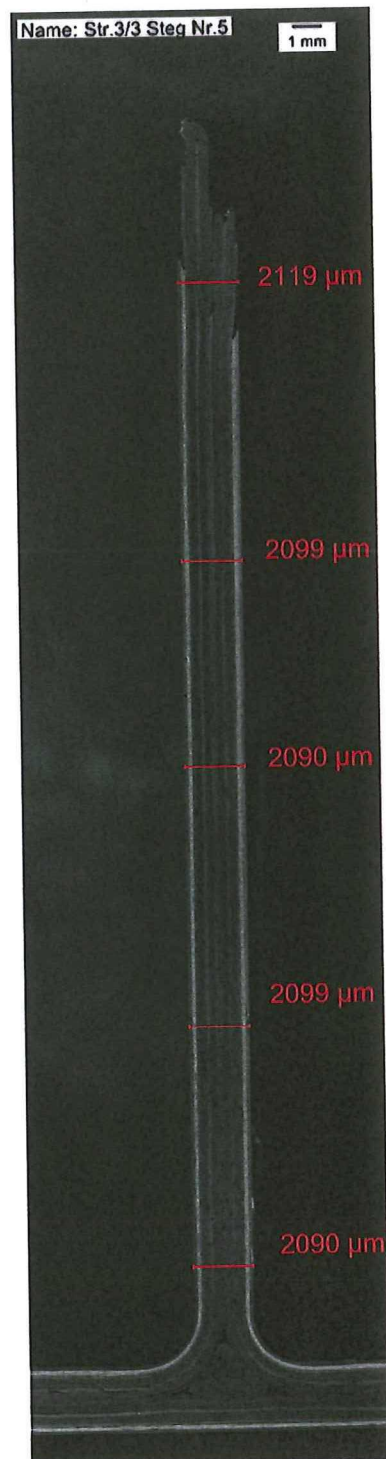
Cross section of panel 3 stringer 1 skin
